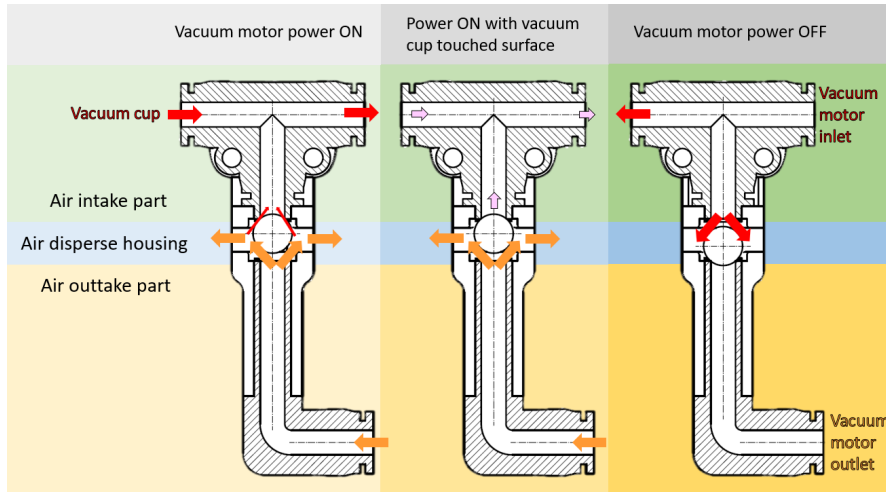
When the vacuum motor is turned on, the small steel ball is blown upward by the air from the outtake part and blocks the intake part. Since this air intake part is connected in parallel with the vacuum suction cup, the small steel ball will not be fully blocking the air intake part until the vacuum suction cup is attached to the surface.
